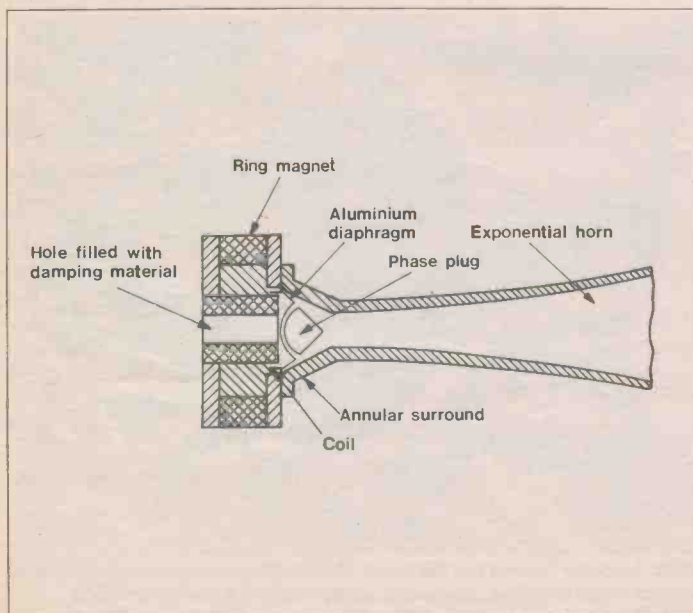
Horn-loaded moving-coil loudspeaker. Early examples used an electromagnet field.
